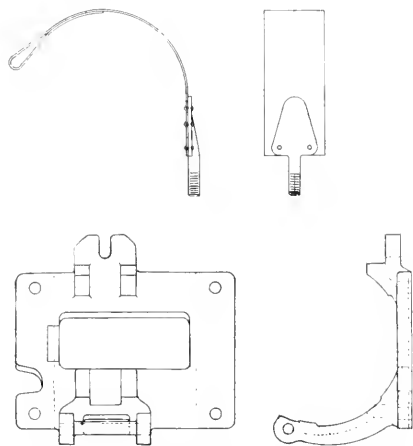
MOUNTING BRACKET AND CLAMPING STRAP FOR A ROUND GENERATOR
